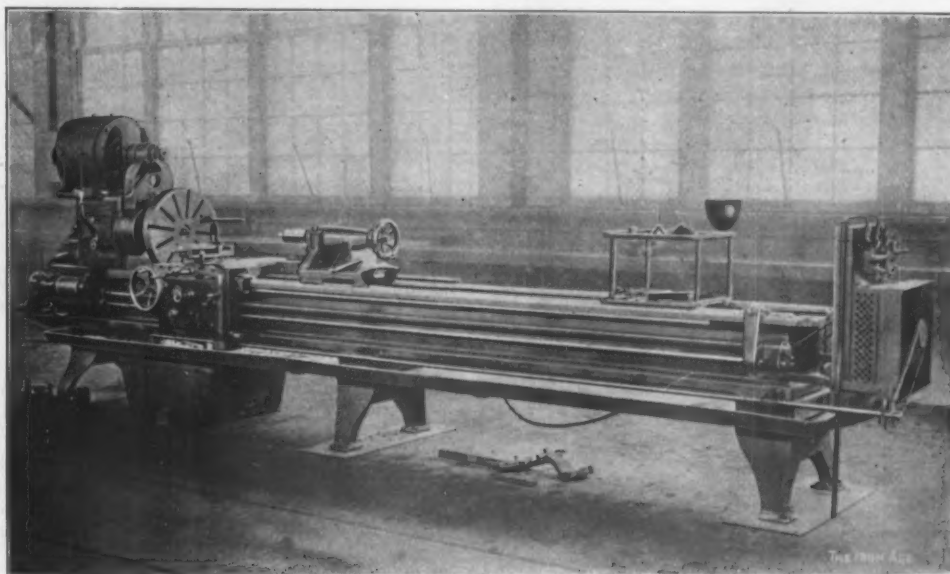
A Motor Driven Lodge & Shipley Lathe Controlled from the Apron.
